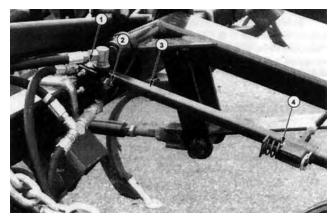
Depth Stop Adjustment System. (1) Depth Stop, (2) Shut-off Needle, (3) Depth Stop Rod and (4) Depth Stop Adjustor Assembly.
